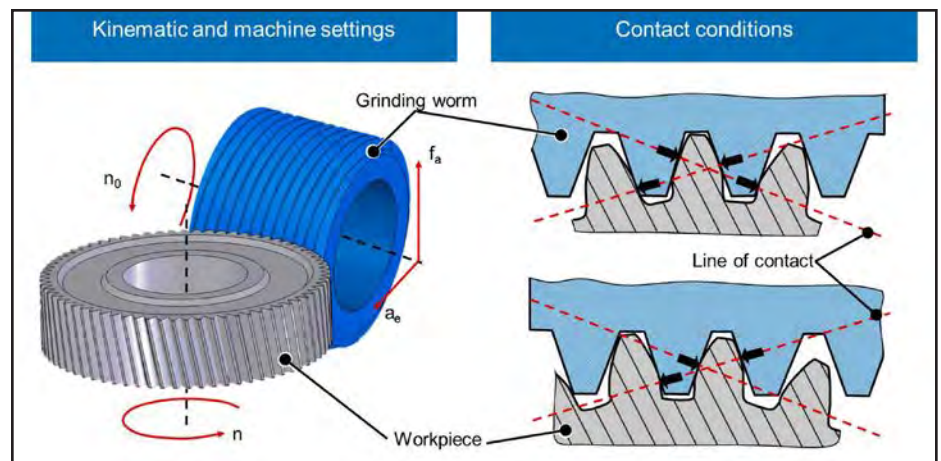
Generating gear grinding: principle, machine settings, and contact conditions (Ref. 9).
